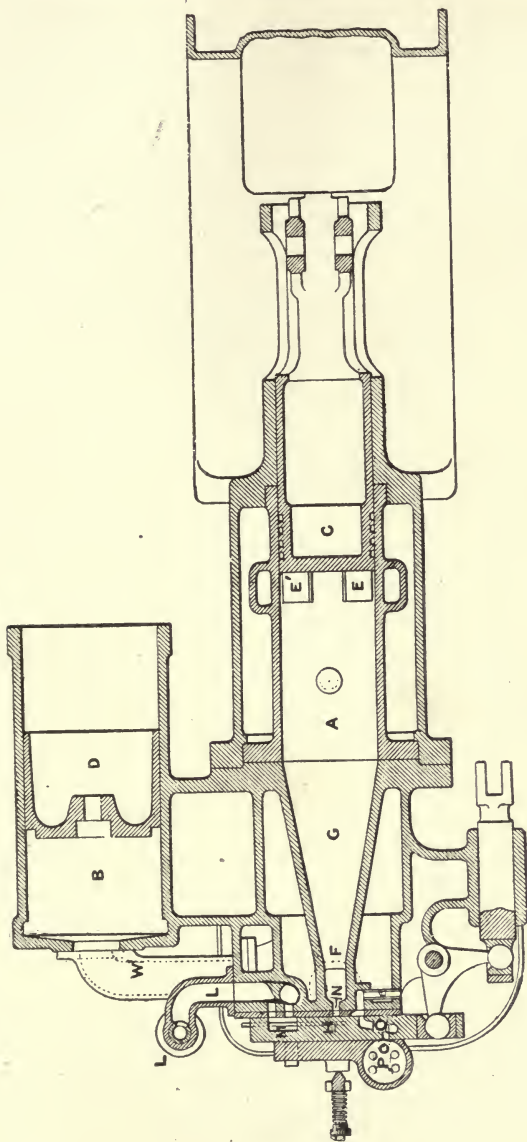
Sectional Plan of Clerk Gas Engine.
